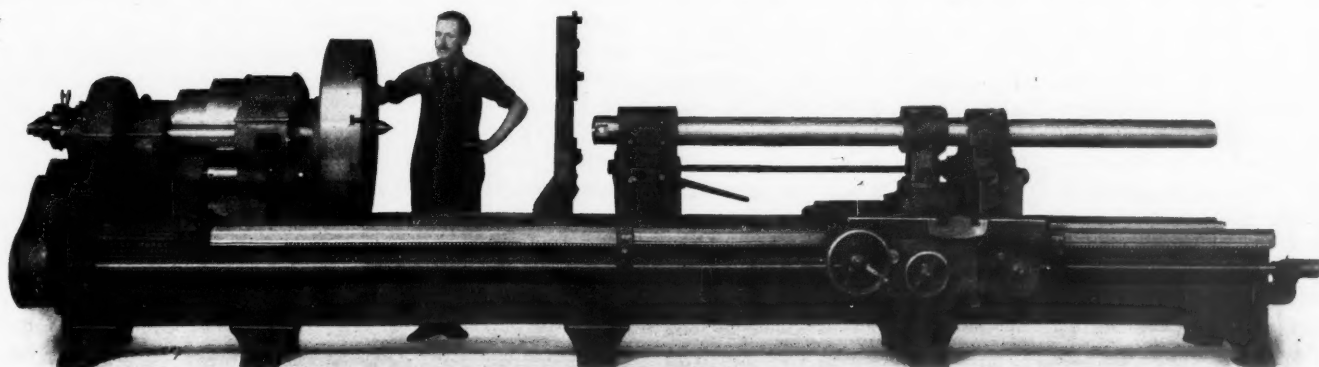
Niles-Bement-Pond 36-inch Triple-geared Lathe equipped with Boring-bar mounted on Carriage
